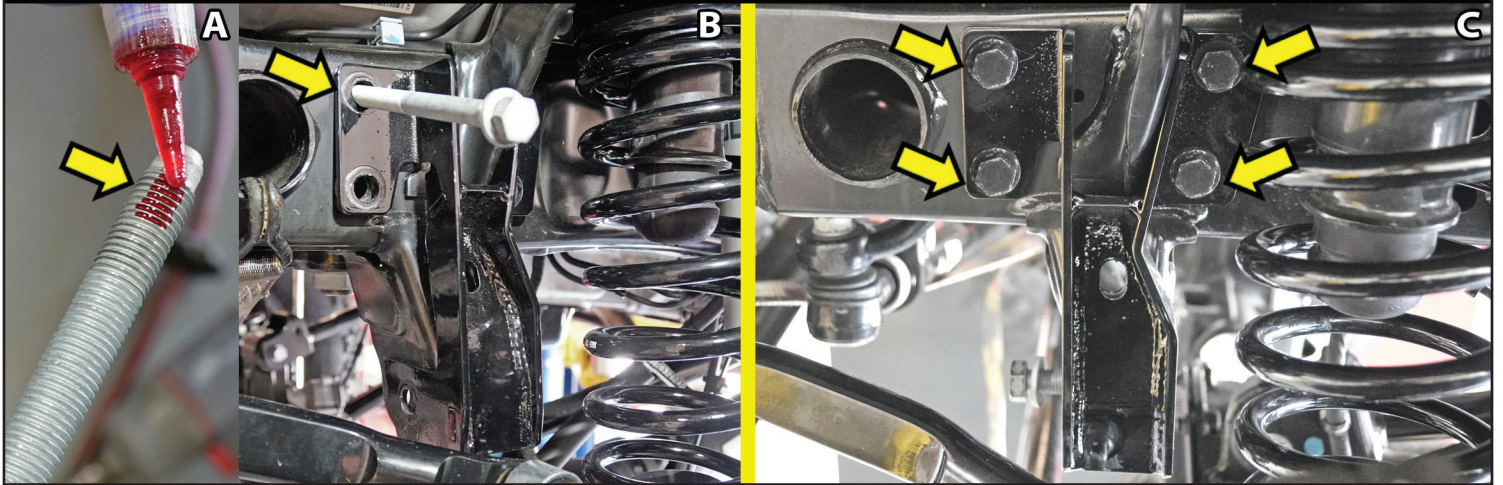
B] Position the 55-30-5825 track bar brace bracket onto the outer frame rail and align with the (4) steering gear box mounting holes. Starting with the upper front bolt, install the factory bolt through the bracket, frame rail and through the gear box. Attach the factory nut.
